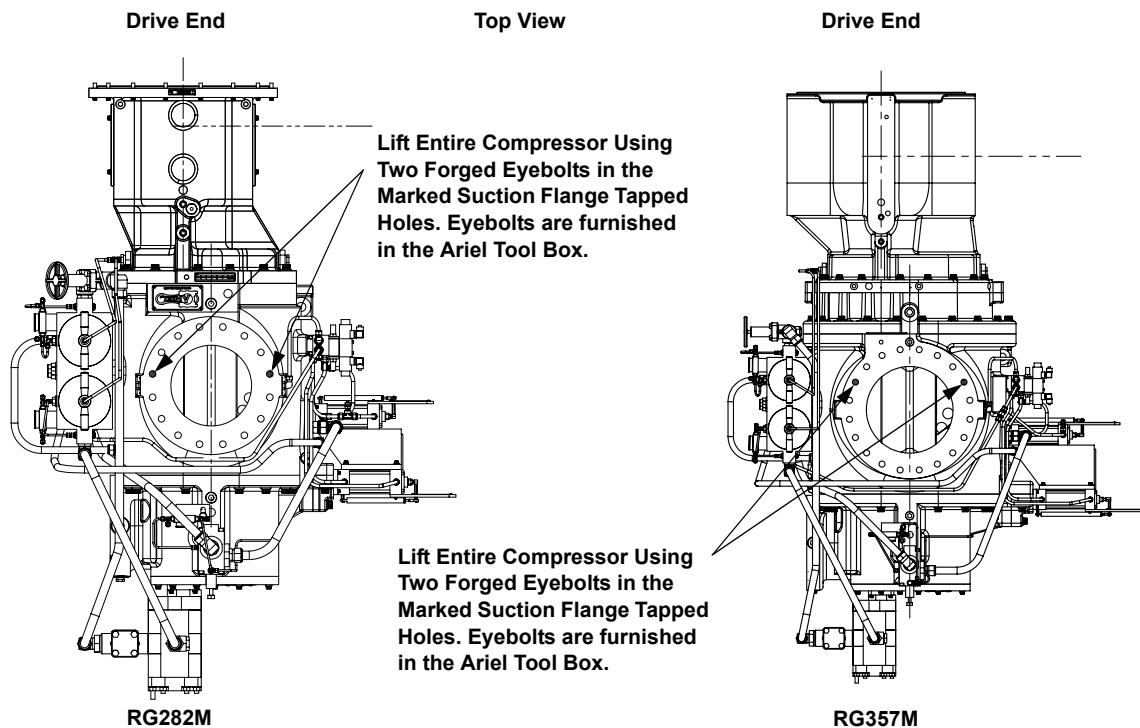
LIFTING POINTS FOR COMPRESSORS WITH BELL HOUSING
